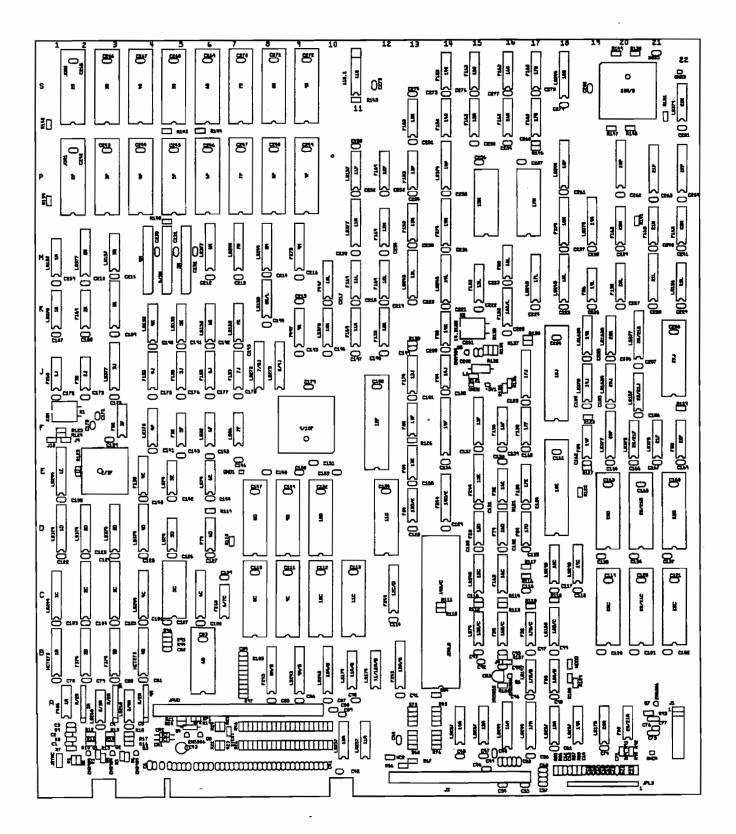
Guardians of the 'Hood Game PCB Assembly
